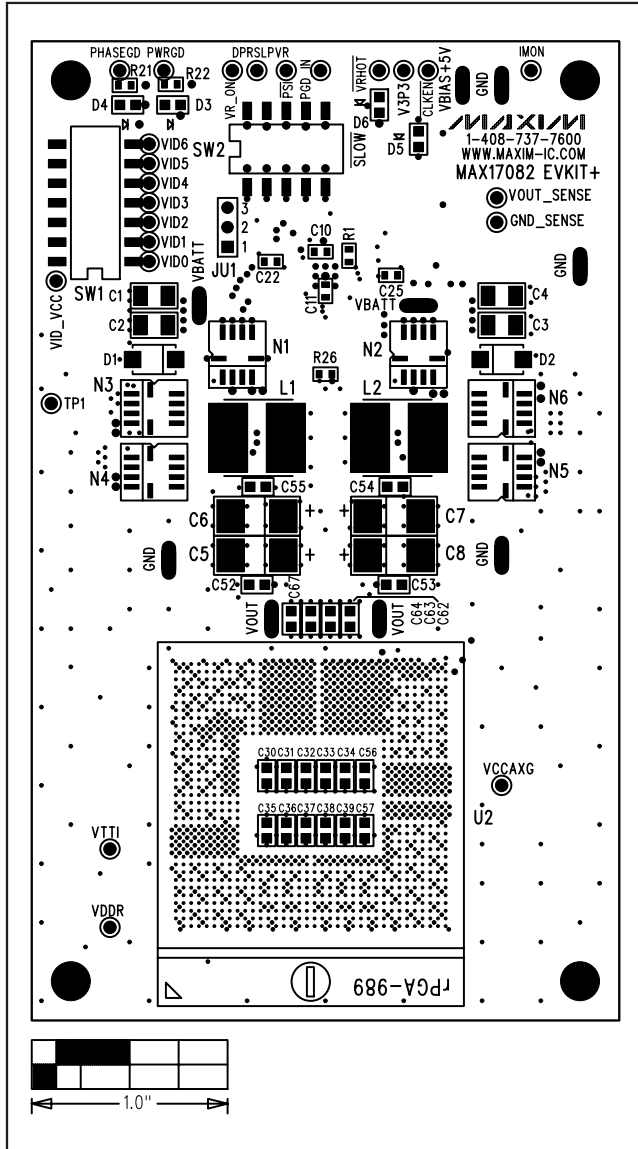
MAX17082 EV Kit Component Placement Guide—Component Side
